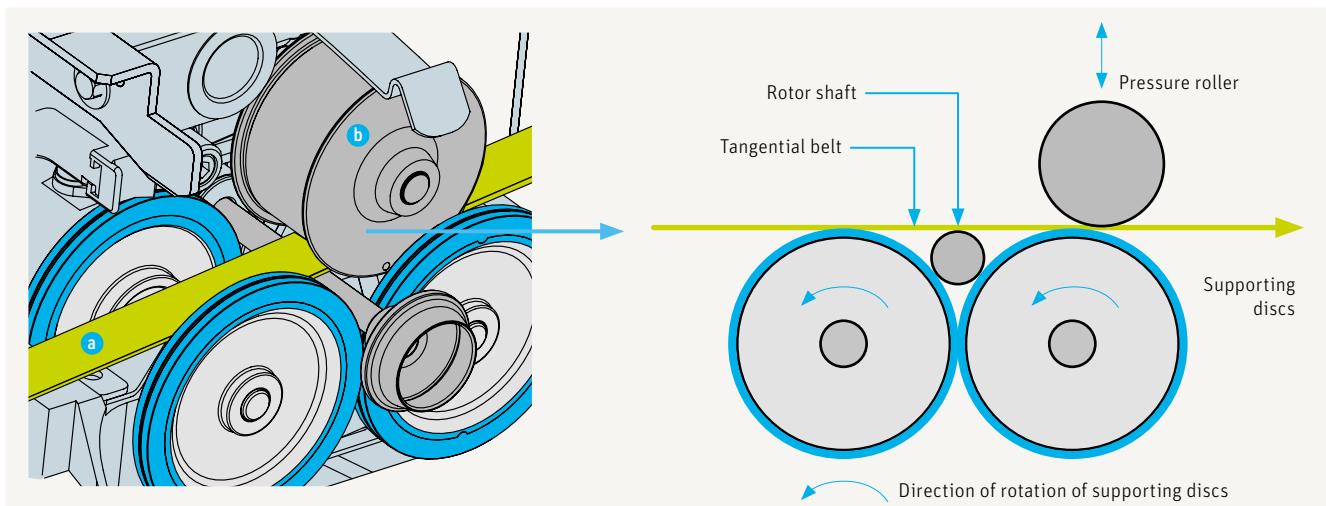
Support-disc bearing (Twindisc bearing) with pressure roller (b) for tangential belt (a)
